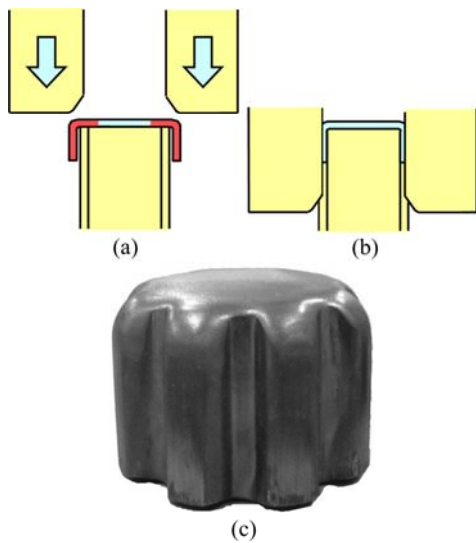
Hot spline forming of die-quenched gear drum using resistance heating: (a) Heating at 900 °C; (b) Die quenching; (c) Formed drum
